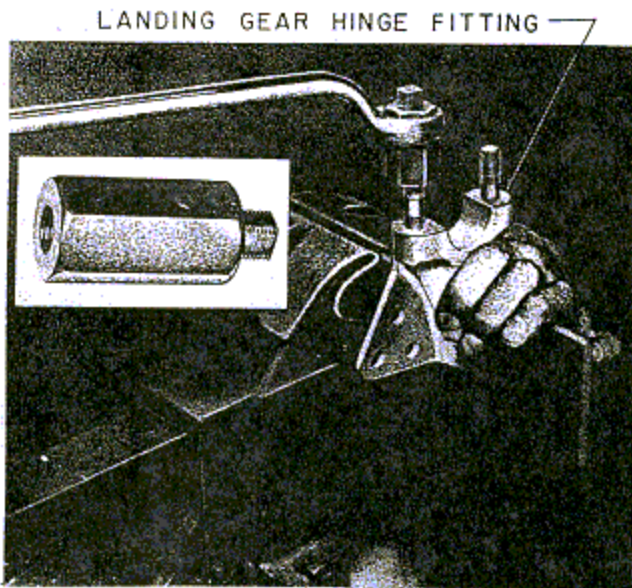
Stud Driver—Landing Gear Hinge Fitting, P-17522
